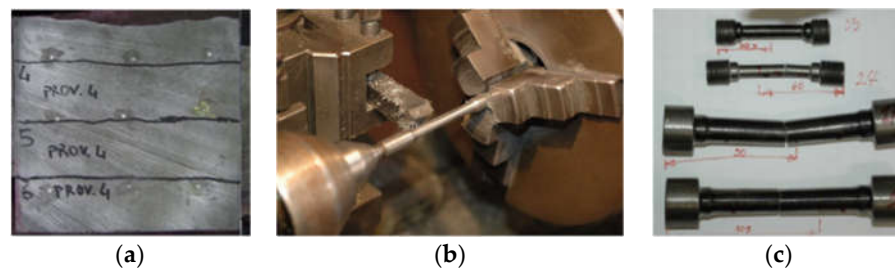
Different phases of the production and testing of the standardized specimens: (a) splitting of the cube into specimens; (b) machine tool processing of the ‘dog bone’ shapes; (c) specimens after failure.
